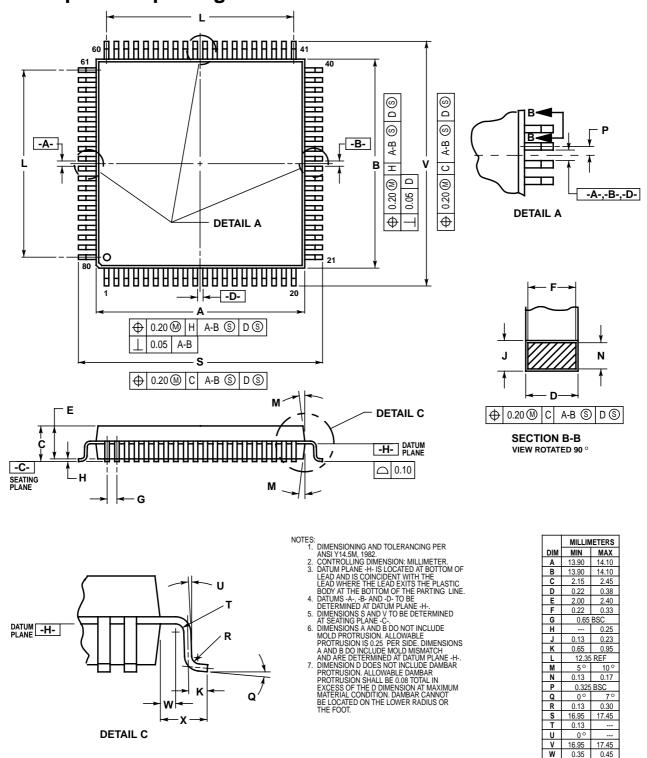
80-pin QFP Mechanical Dimensions (case no. 841B)
